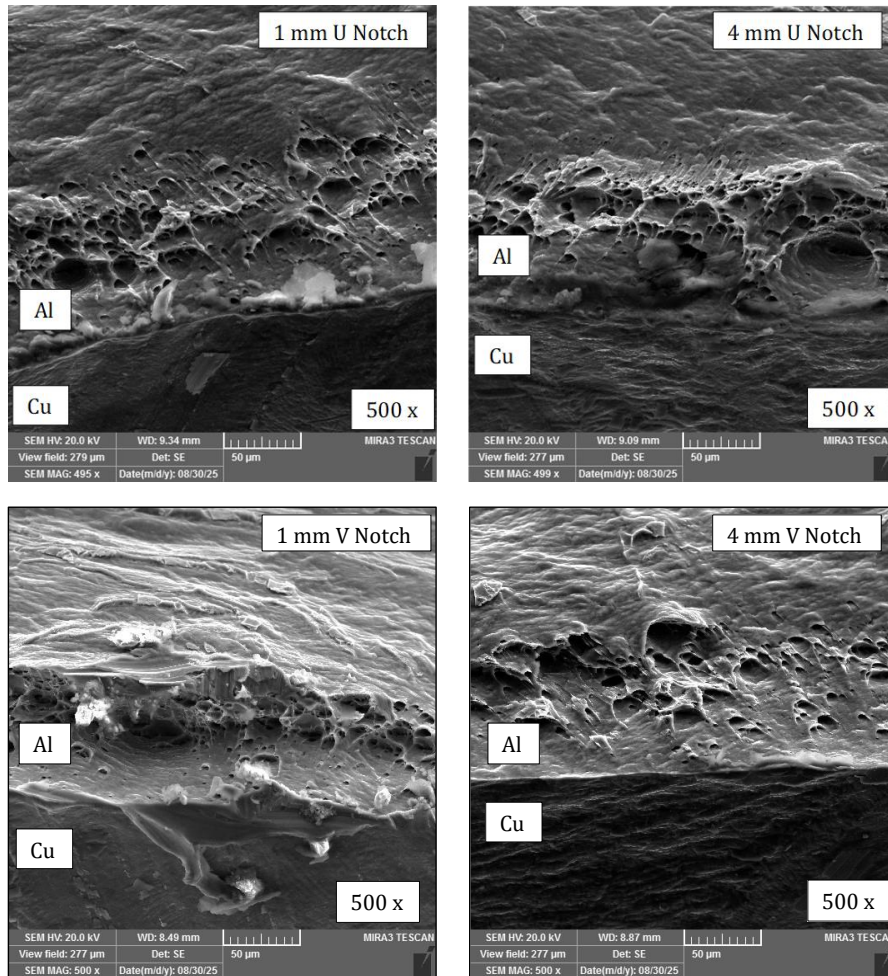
Impact fracture surface of V and U notches specimens (All SEM micrographs were captured at an intermediate cross-section of the fracture surface width).
